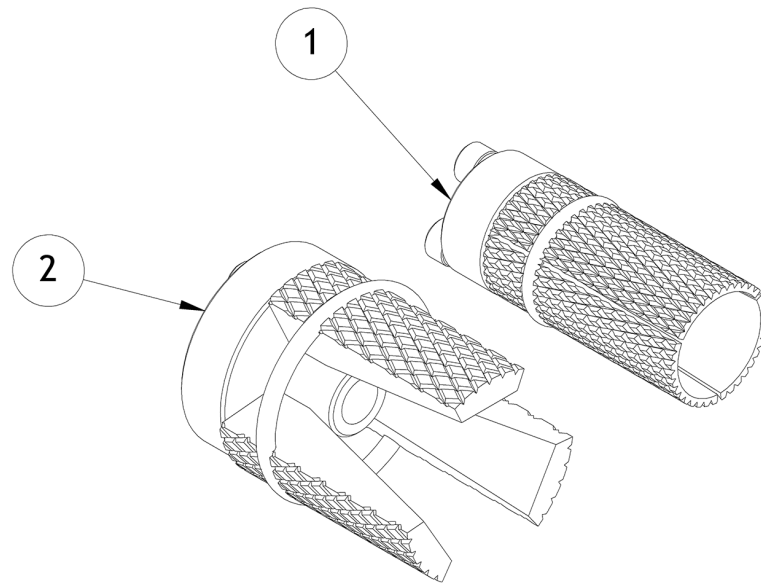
BG44 BOILER GUN - WRENCH FEED, ELECTRIC ASSEMBLY (P/N BG44WR-E)
